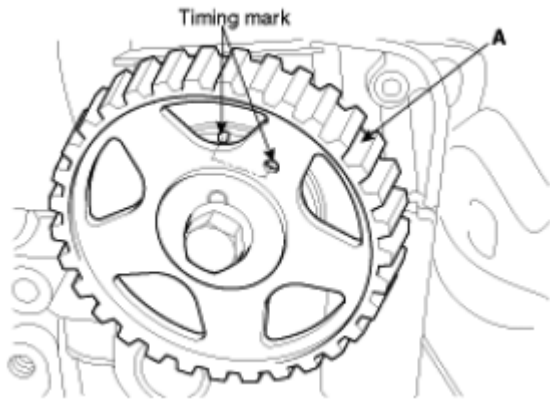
Checking That Timing Mark Of Camshaft Sprocket Is Aligned With Timing Mark Of Cylinder Head Cover
